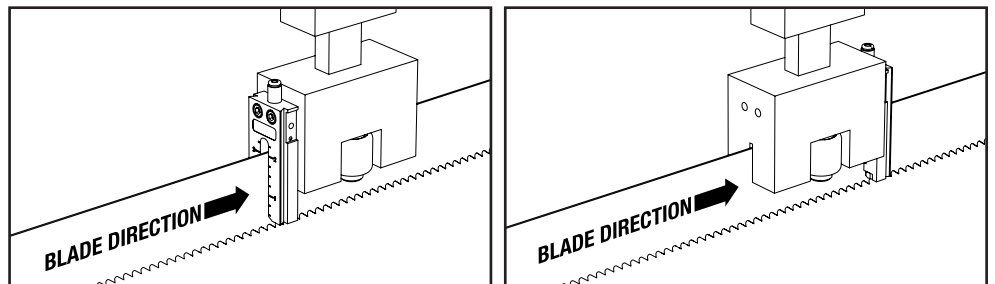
The Band Saw Blade Nozzle can be mounted directly to the entry or exit of the blade guide
